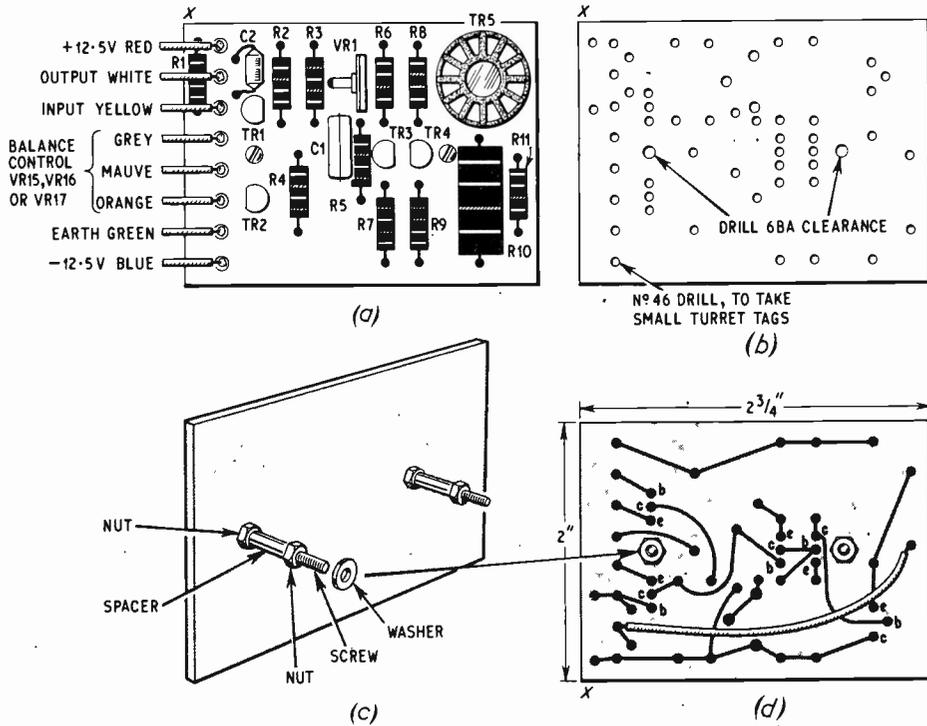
UNIT "A" Operational amplifier constructional details. (a) component layout; (b) panel drilling; (c) mounting screws and stand-off spacers; (d) underside wiring (with 2N2926 used for TR1, TR2, and TR3)
